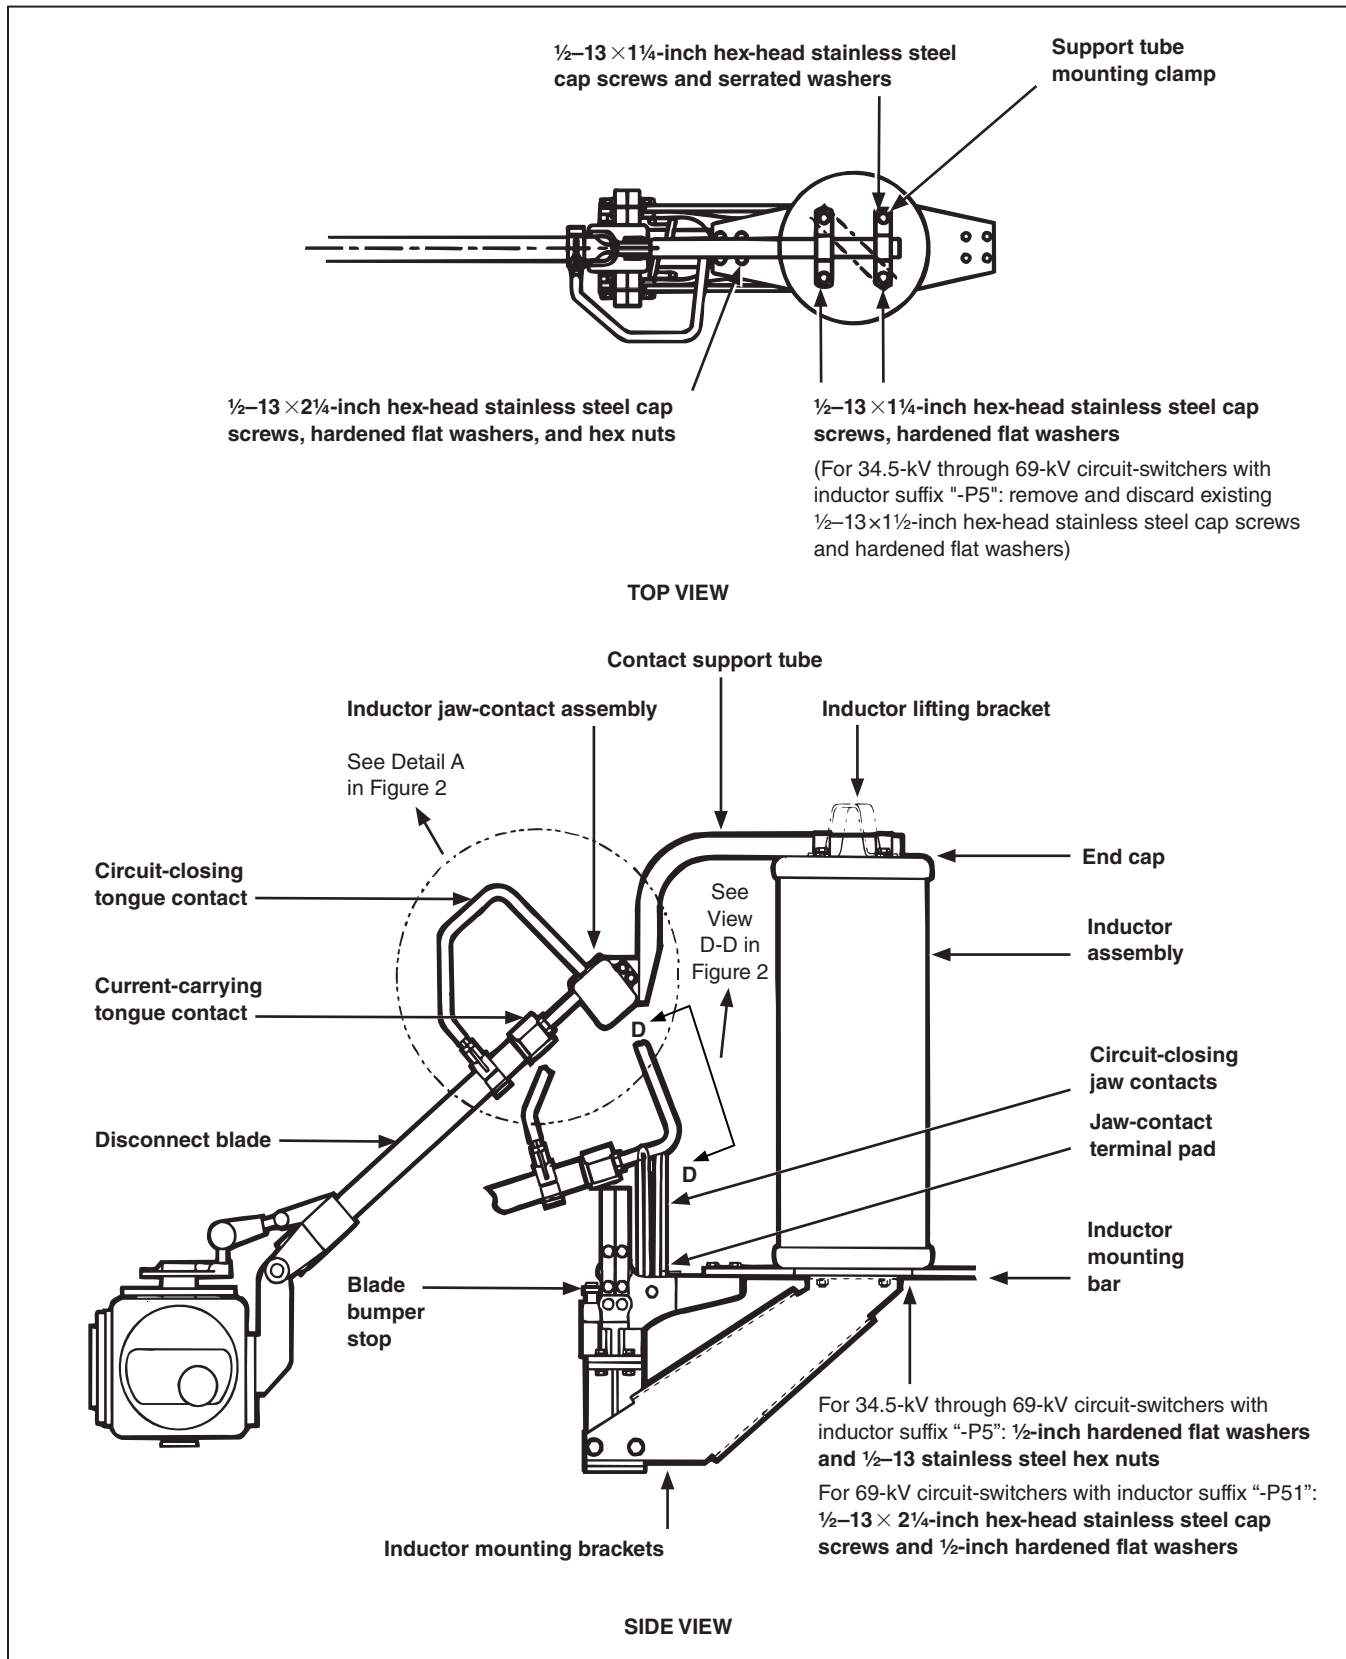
Top and side view assembly details of standard-duty pre-insertion inductors for 34.5-kV through 69-kV vertical-break style and integer-style circuit-switchers.
